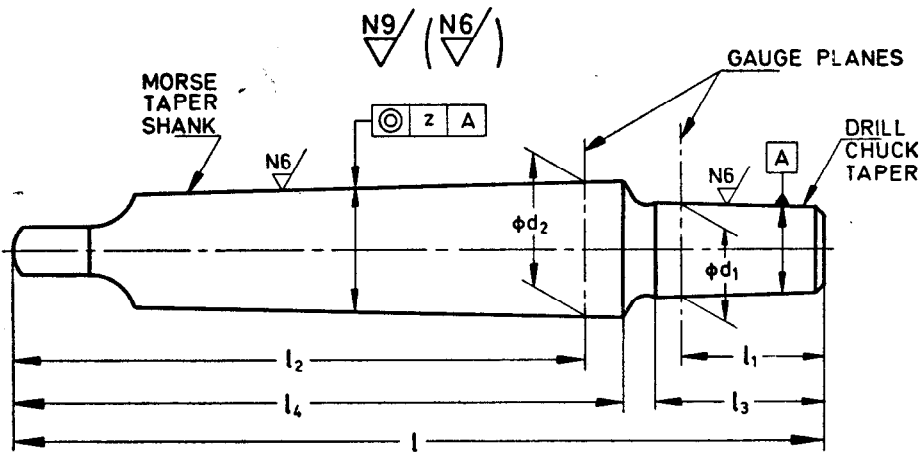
TAPER SHANK $<$ DRILL CHUCK TAPER
